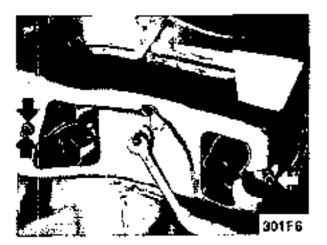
F-6 Tail Light Housing Attaching Nuts Models 5 1-53
